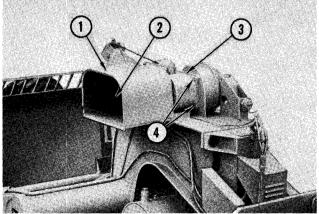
MOTOR AND GEAR BOX, MOUNTED 1. Cover 2. Motor 3. Gear Box 4. Mounting Capscrews
